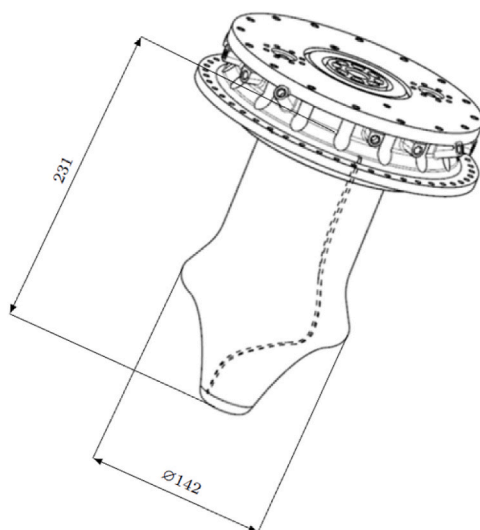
Plug with the welded cover: the dimensions are in mm.
